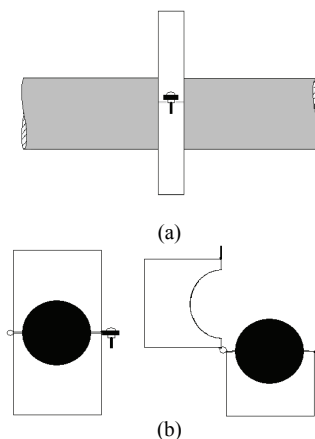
Clamp and flexible sealant for the remote unit set. a) Front view, b) Side view.
